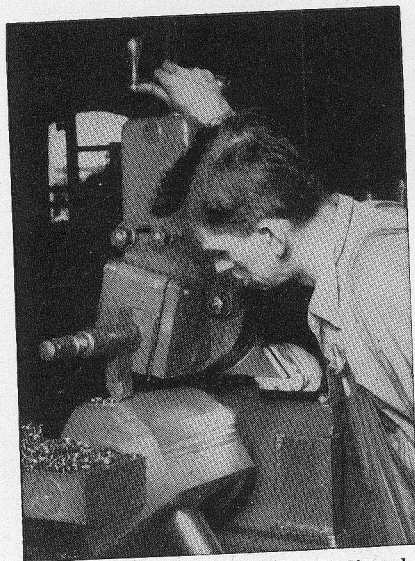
Tool bit clamped directly to tool post in shaper. (*The Cincinnati Shaper Company*)
